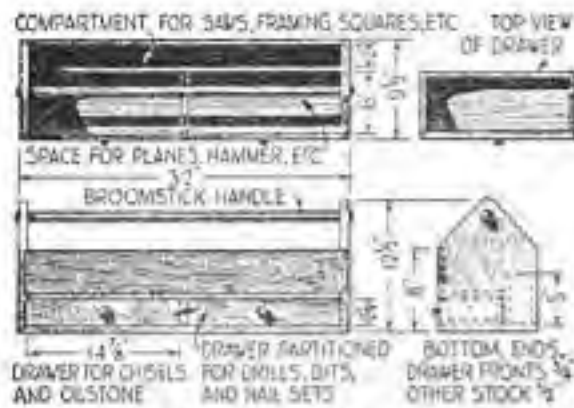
The front and end views of the tool-carrying box shown in Fig. 36, and the drawer.
